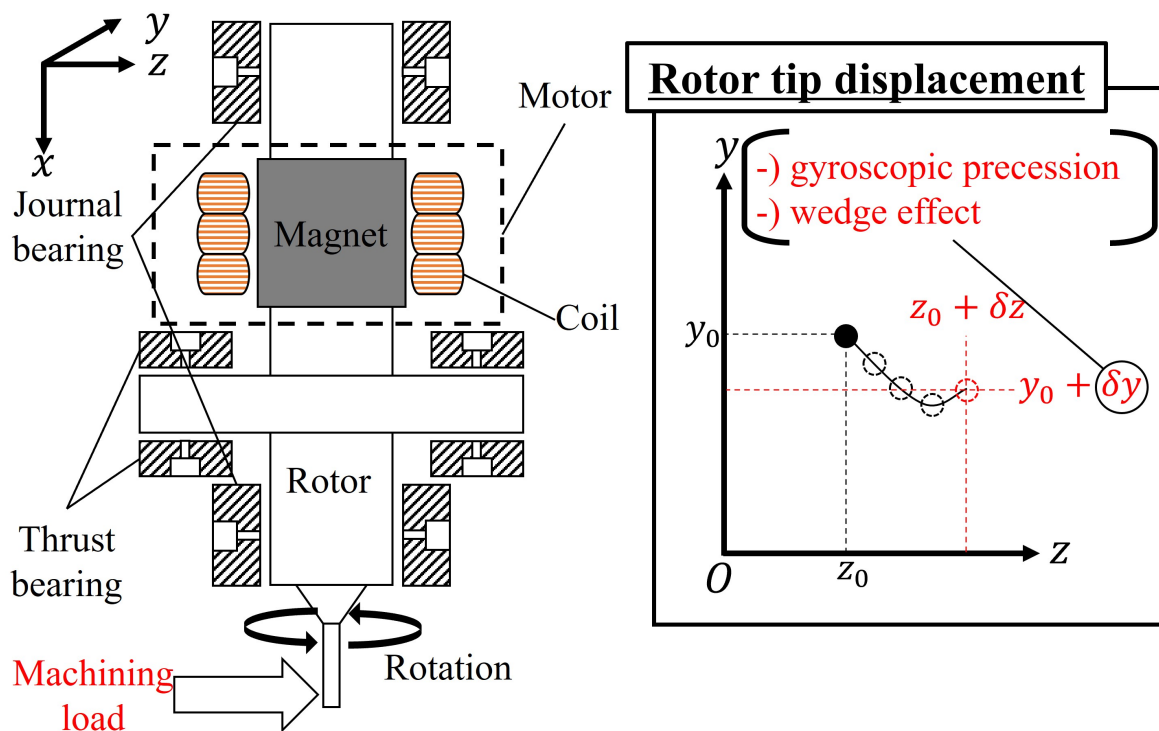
Rotor tip displacement when machining load acts on spindle.
